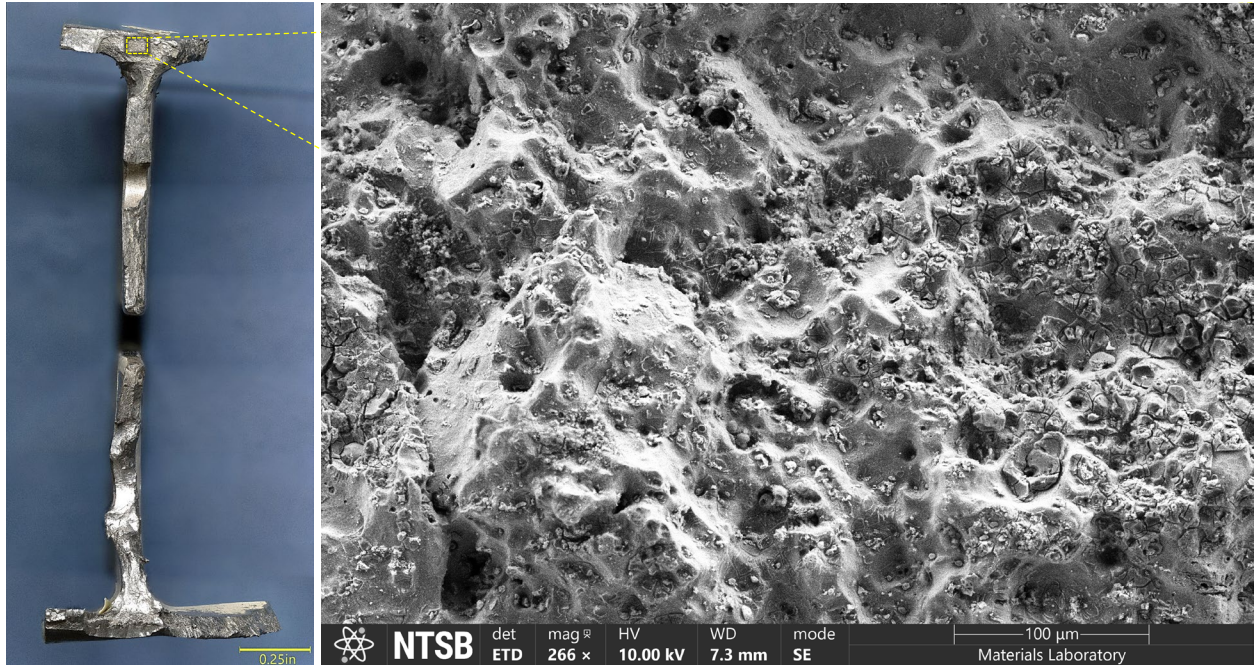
Secondary electron fractograph of a flatter region on the fracture surface of the upper main spar cap (outboard fracture location) showing some residual oxide layer (mudcracked appearance) over a dimpled subsurface, consistent with overstress fracture.
